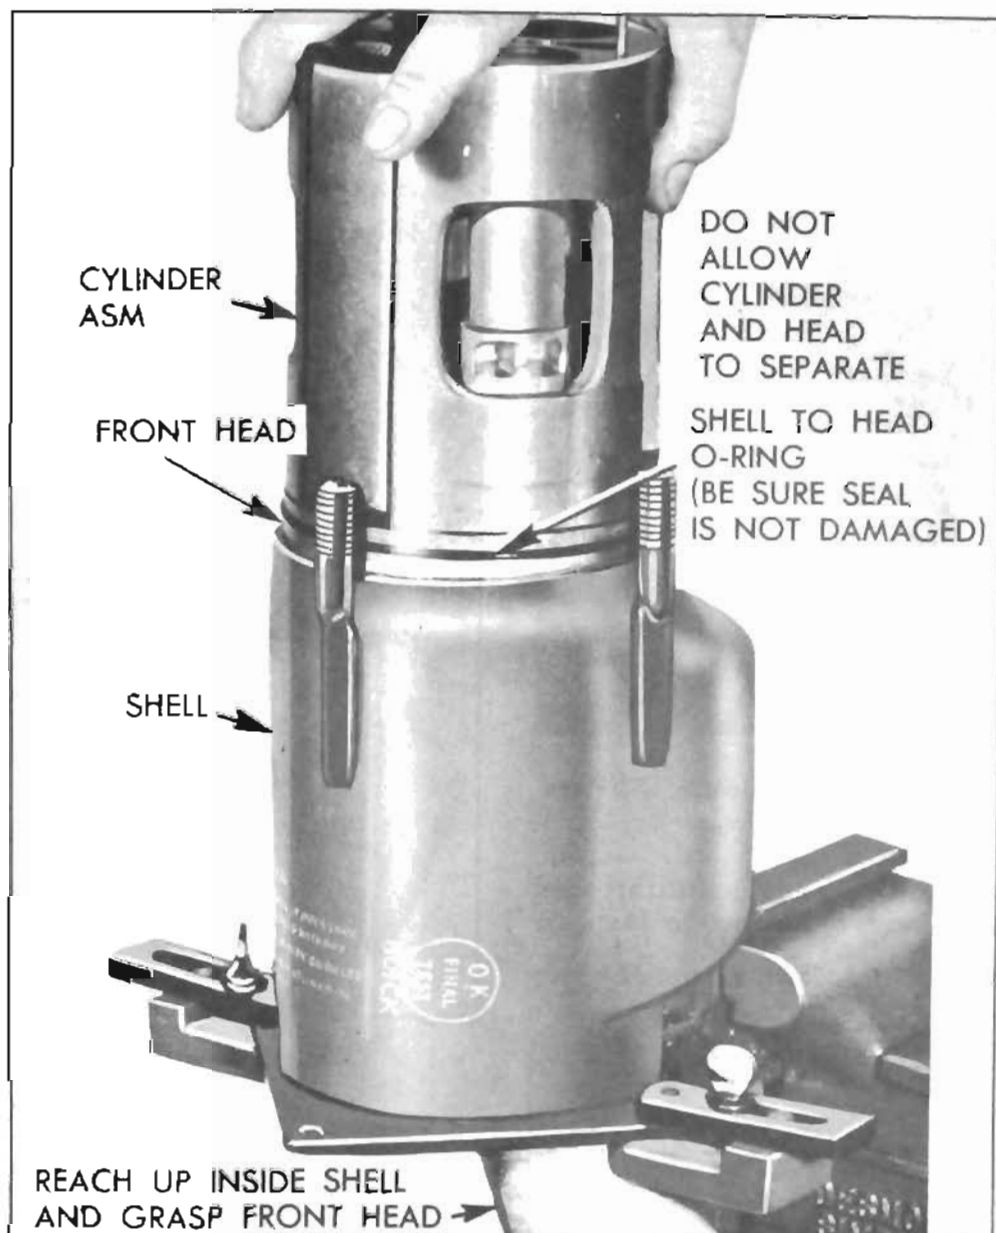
Installing Cylinder Assembly and Front Head in Shell
